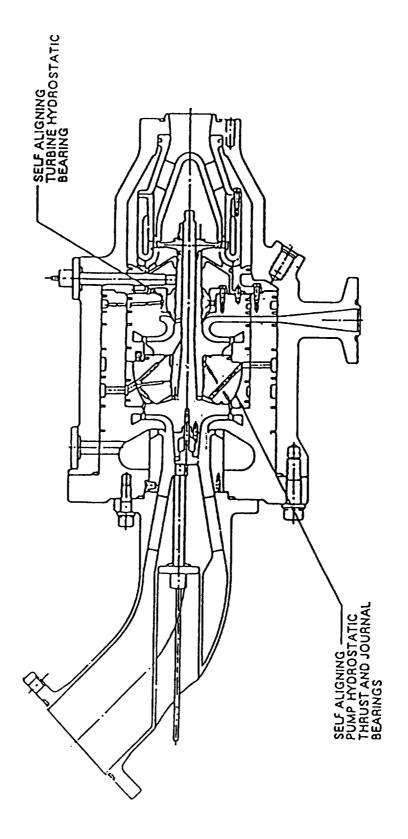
OTV Oxygen Conventional Self-Aligning Hydrostatic Bearings (3.5K Size)
